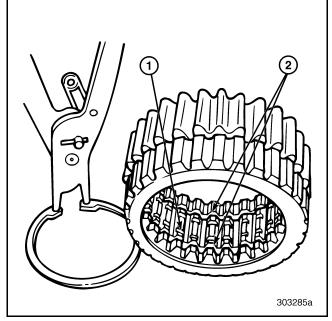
Installing Gear Snap Ring (T313L/T318L Shown)
